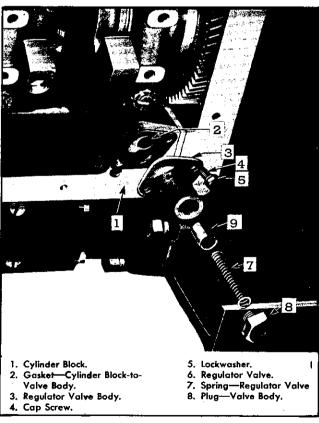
Lubricating Oil Pressure Regulator Valve and Relative Position of Parts.
